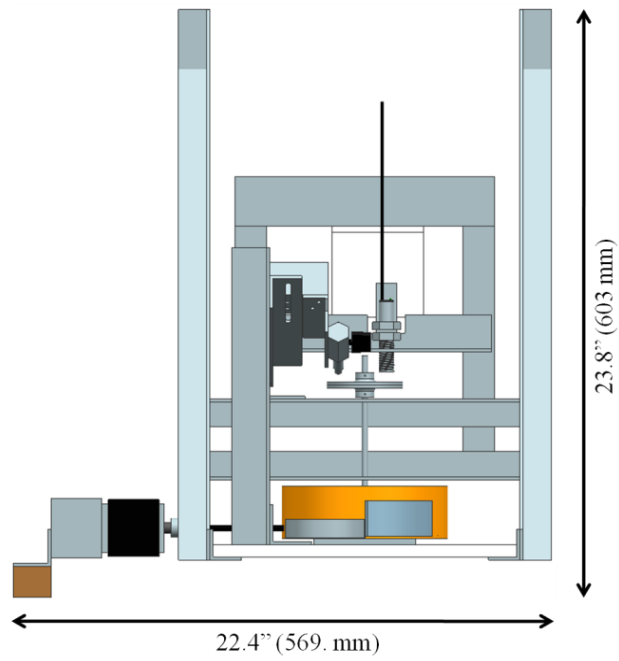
CAD Front View of Dynamometer Assembly, Scale 1:8
